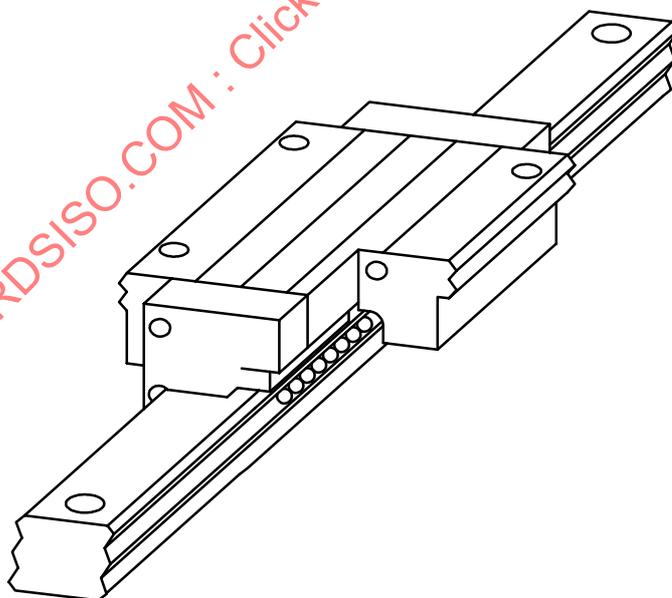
Recirculating linear ball [roller] bearing, linear guideway type
